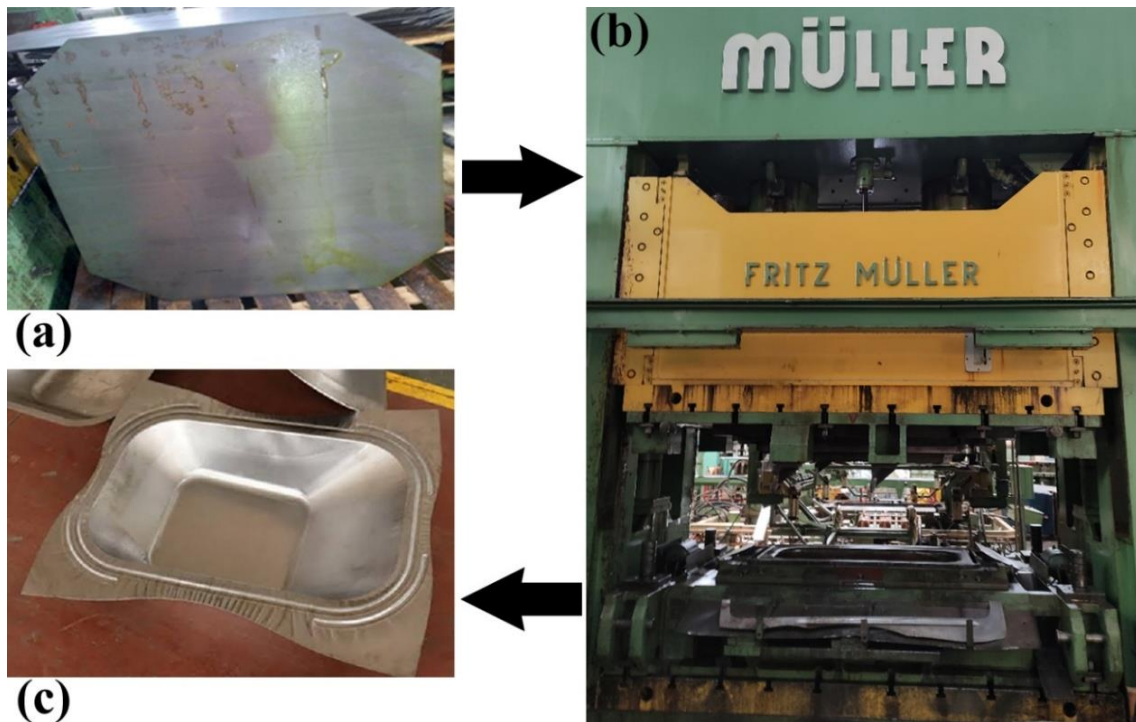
Deep drawing operation for the WBT: (a) DC06EK sheet metal, (b) BZE1600-32 press, (c) semi-finished product.
